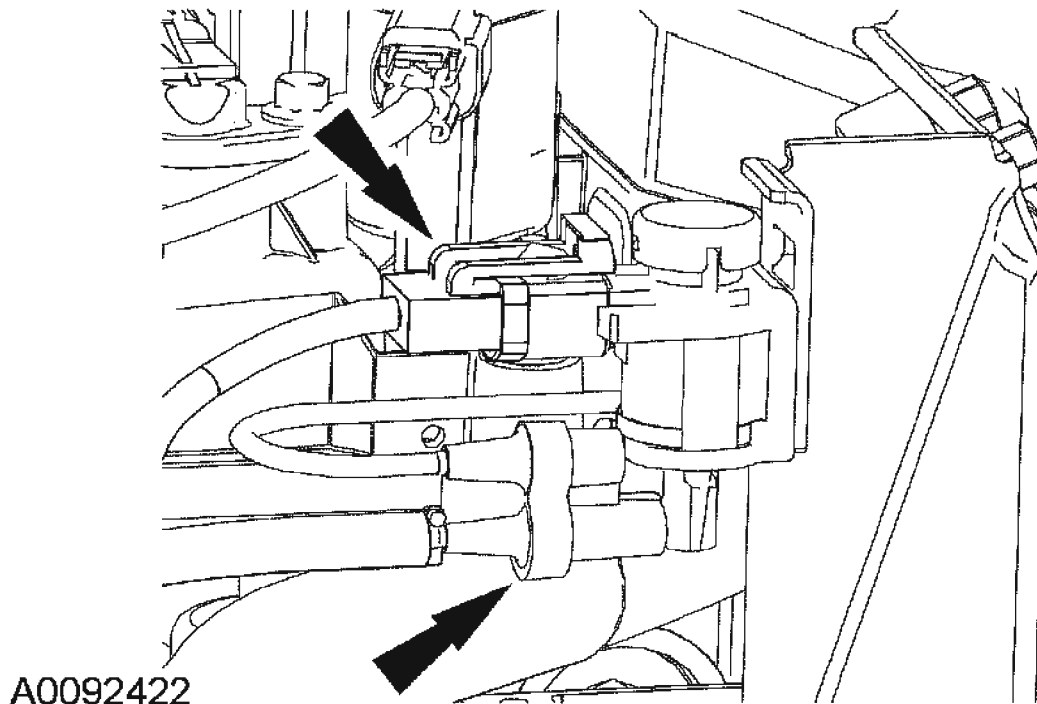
Disconnecting Secondary Air Injection Vacuum Regulator Electrical Connector And Vacuum Hose
